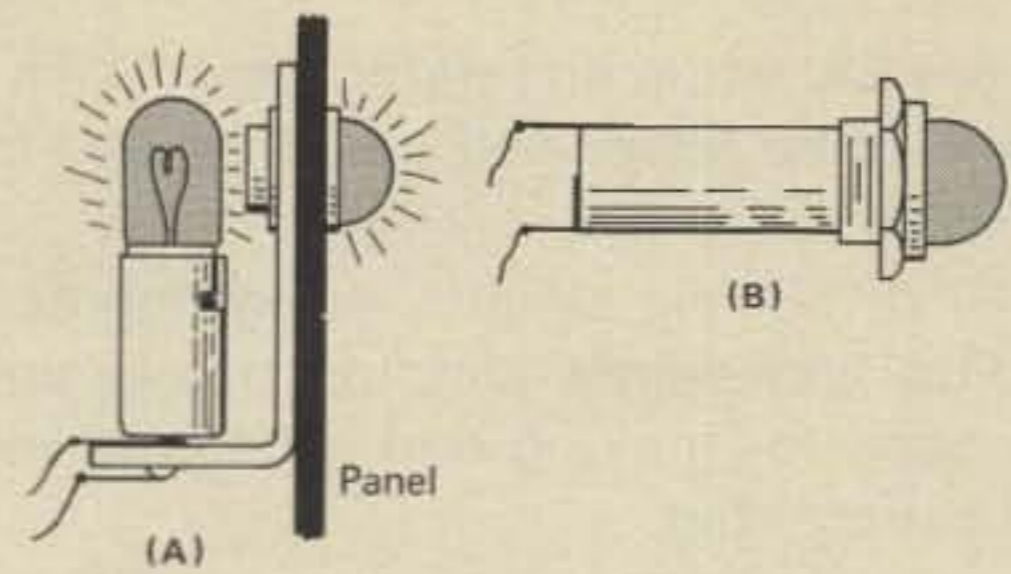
(A)—Cross section of lamp assembly mounted on a panel. (B) Sealed type of panel lamp mount.
